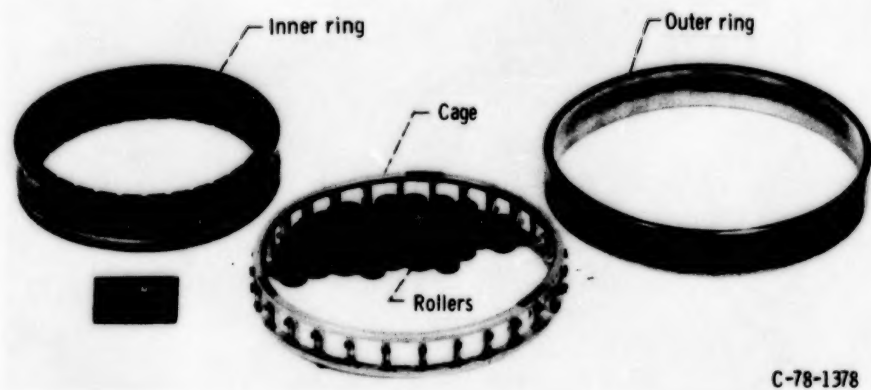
118-Millimeter-bore, high-speed roller bearing after 111 hours of running. Radial load, 2200 to 8900 newtons (500 to 2000 lb); shaft speed, 10 000 to 25 500 rpm ( $1.2 \times 10^6$  to  $3.0 \times 10^6$  DN); maximum bearing temperature, 500 K (441° F).
